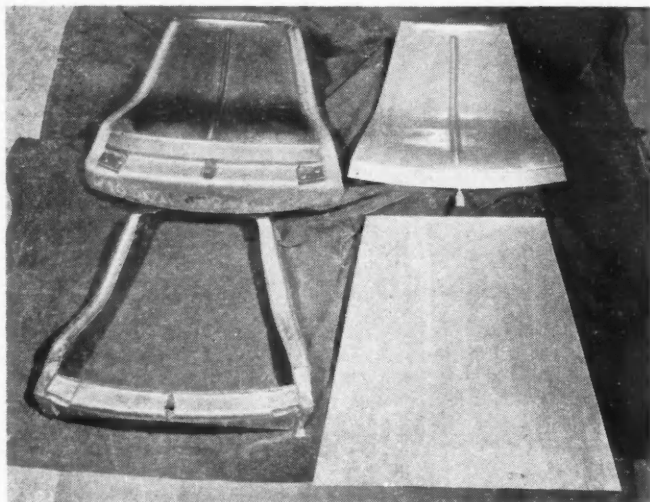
Combination shear and form die. Die and scrap at left. Completed part and unformed, uncut blank at right.
